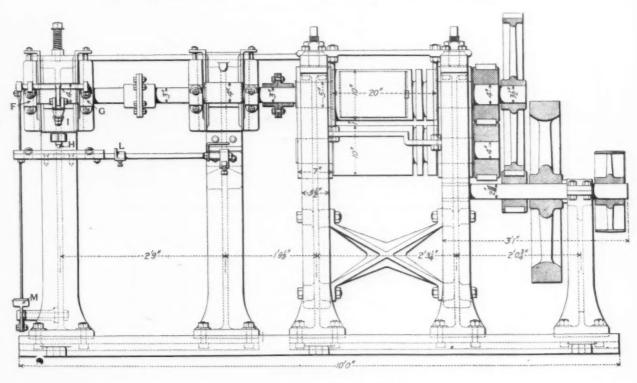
Nibbing, Rolling and Shearing Machine.
